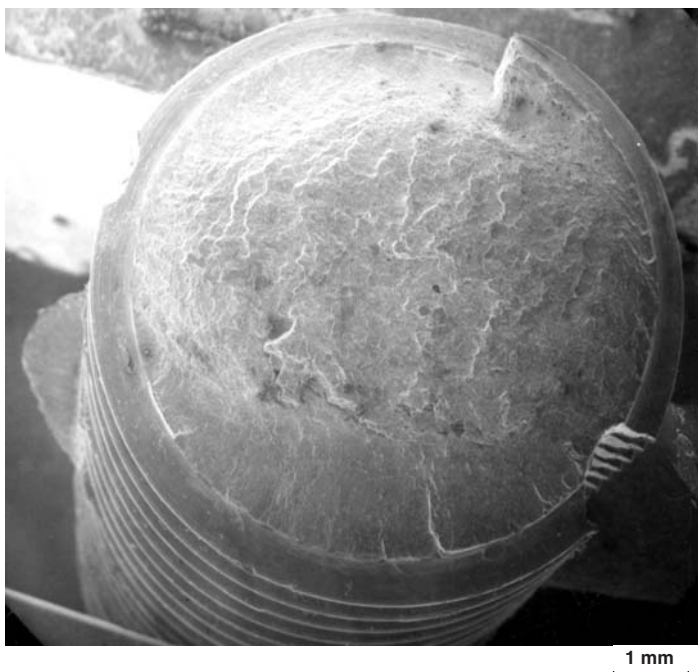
Fracture surface of the failed stud showing the fatigue zone
